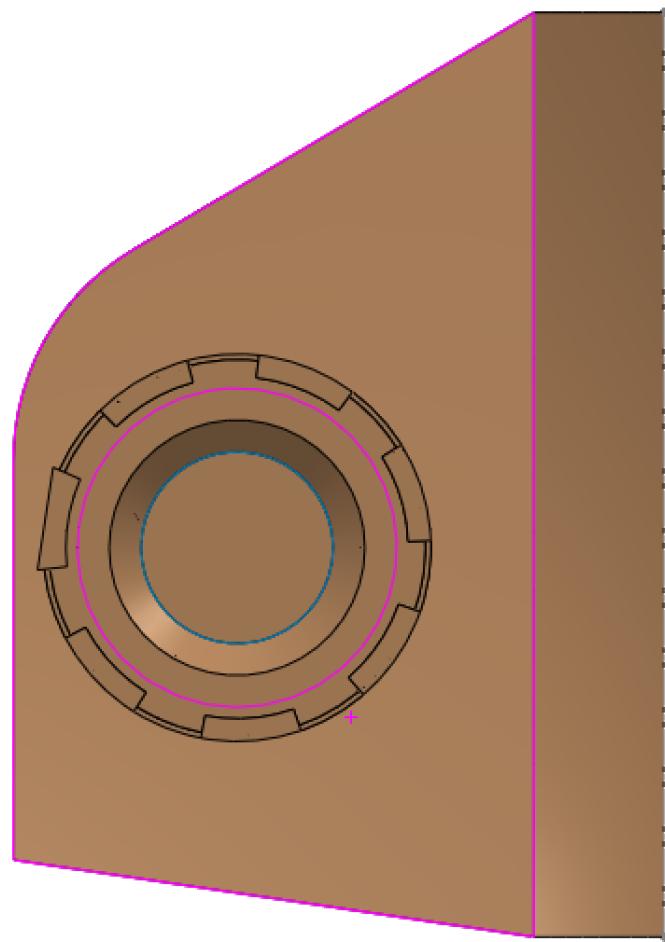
Kumar, Vishakh: Cockpit View 3
